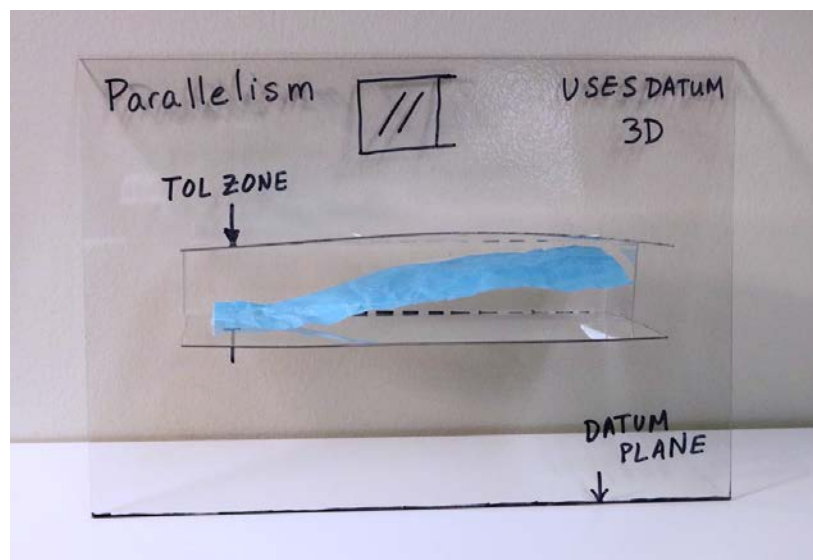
GD&T Spatial Learning Tool for Parallelism Tolerance
